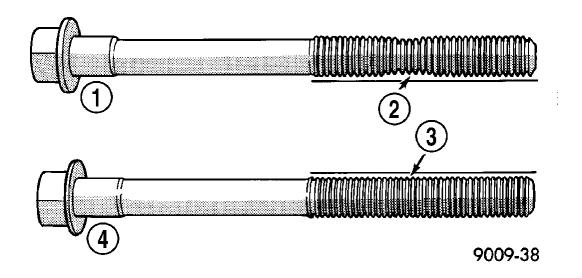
Checking For Stretched Bolts Courtesy of CHRYSLER LLC
